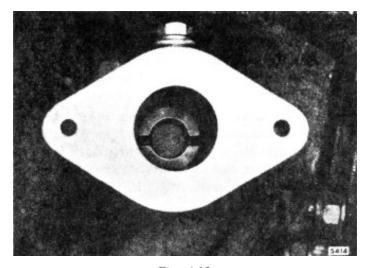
Replacing the distributor drive gear. The slot is horizontal with the large offset uppermost
